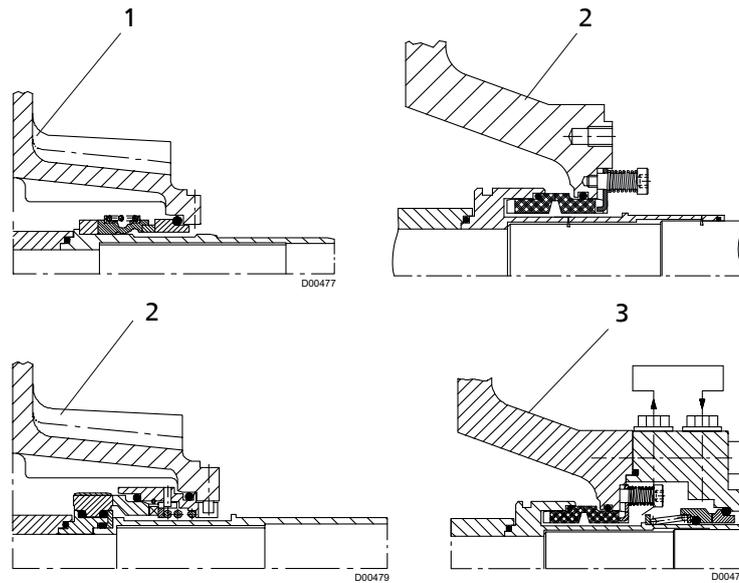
Mechanical seals in conical seal chamber (A-type)
